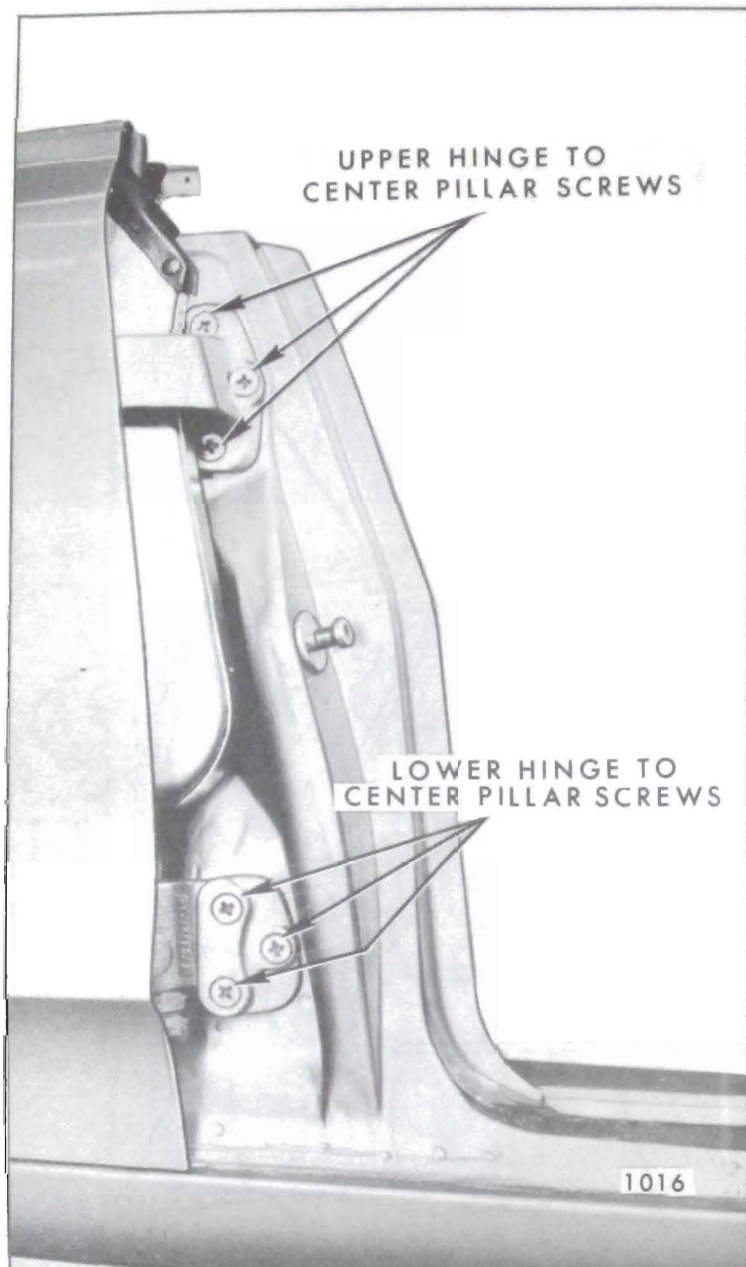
Rear Door Hinge Attachment - "B" Style
